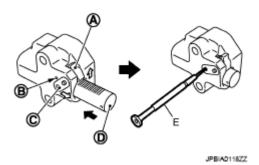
Inserting Stopper Pin Into Tensioner Body Hole Courtesy of NISSAN MOTOR CO., U.S.A.
